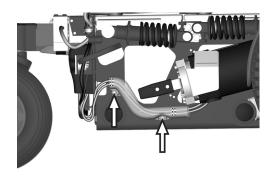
The drive motor cable and the wheel lock cable are held in place with a cable cover.
